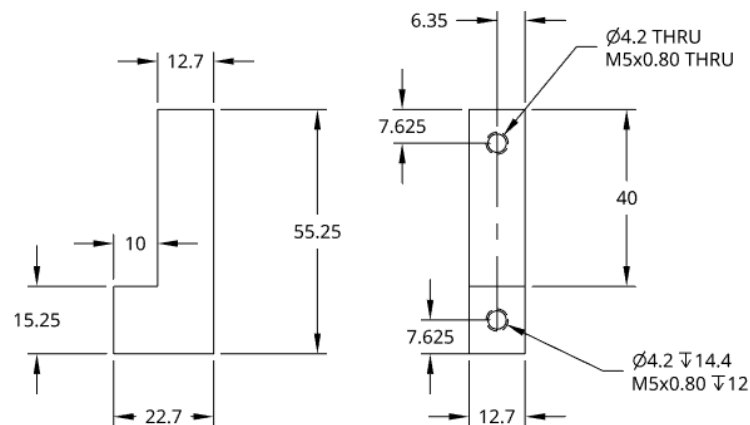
L-Shape Force Sensor Attachment Schematic
